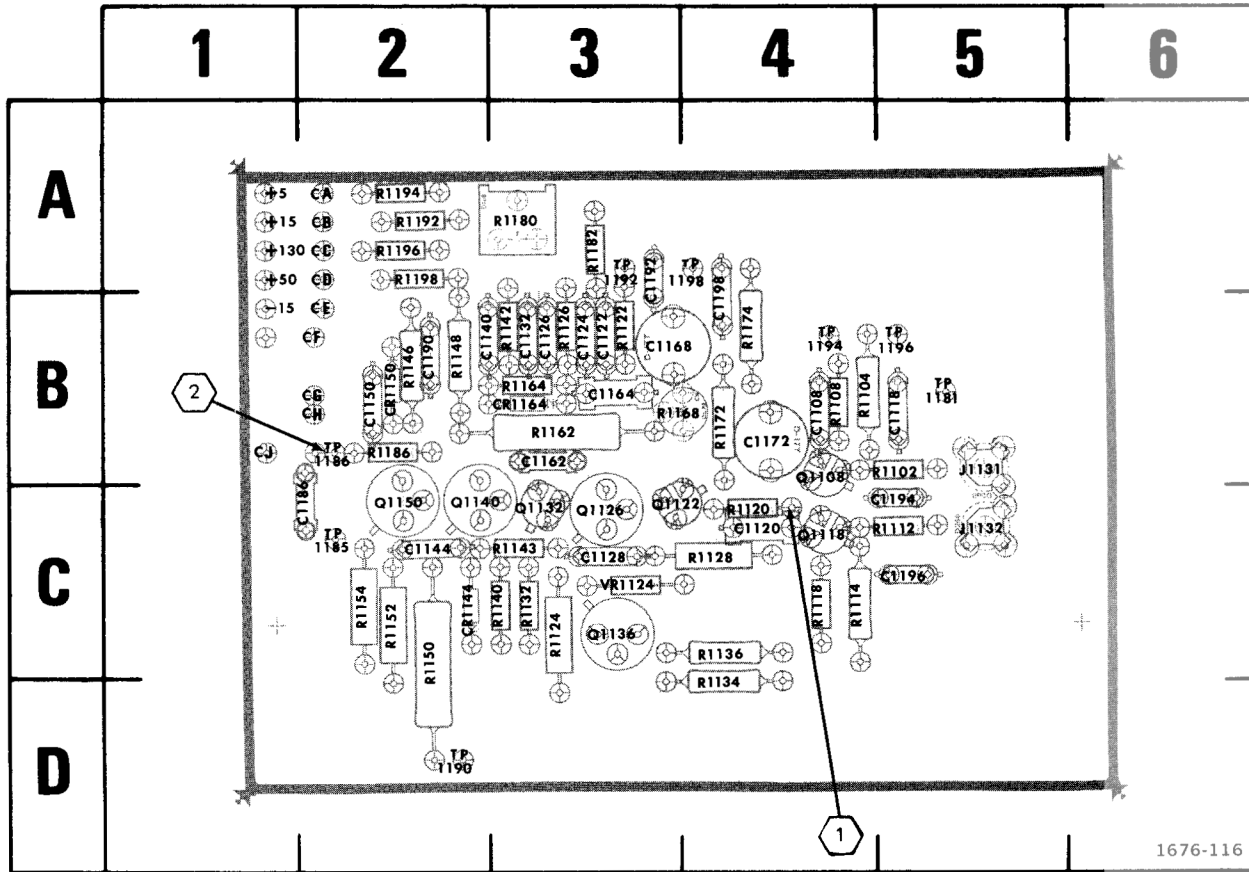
A21—Z-Axis circuit board assembly (Beam 1).
